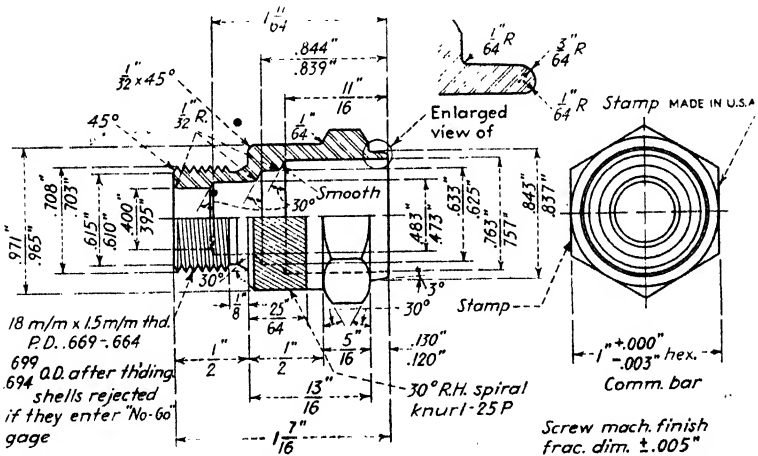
Well-made drawing of a spark-plug shell that is carefully designed for economical production on a multiple-spindle screw machine. Care in indicating limits on all important dimensions and in stating allowable variation on fractional dimensions is noteworthy, as are also the explicit instructions and the enlarged detail of the lip, which is spun in, to hold the porcelain insulator, at assembly. The thread, being back of a shoulder, must be rolled unless produced in a secondary operation. Chamfer at end of knurled portion prevents burrs, and those at the edges of the hex improve appearance. There is, however, nothing (except allowable variations in fractional dimensions) to indicate whether or not the shoulder adjacent to the thread must be square or not, and the designation, "smooth" on one of the interior shoulders is rather indefinite. Stamped letters on two faces of the hex require secondary operations that might have been eliminated by using a roll to apply the letters (in the screw machine) on the cylindrical surface between the knurl and the hex.
